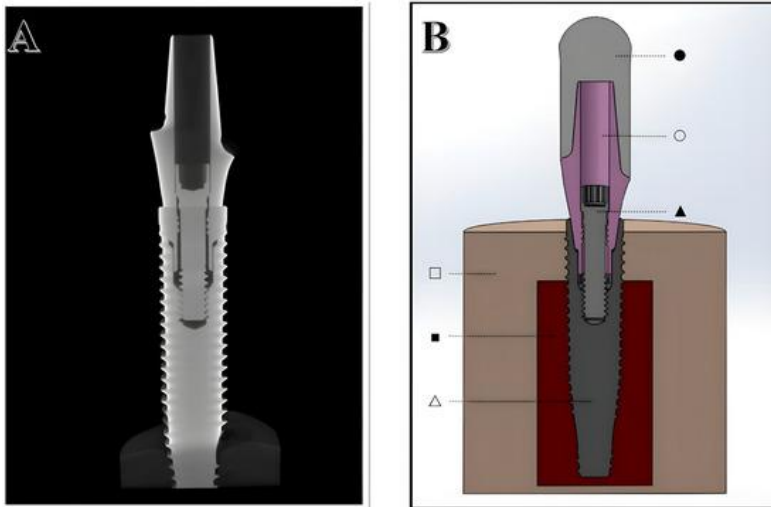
(A) Bucco-palatal cross-section of the implant-abutment assembly obtained from a micro-CT scan. (B) Bucco-palatal cross-section of the SOLIDWORKS assembly created from digitally modeling the physical specimens. The components in (B) are as follows: loading cap (● pearl white), reference abutment (○ pink), connector screw (▲ light gray), implant body (△ dark gray), cortical bone (□ beige), and cancellous bone (■ dark red).
